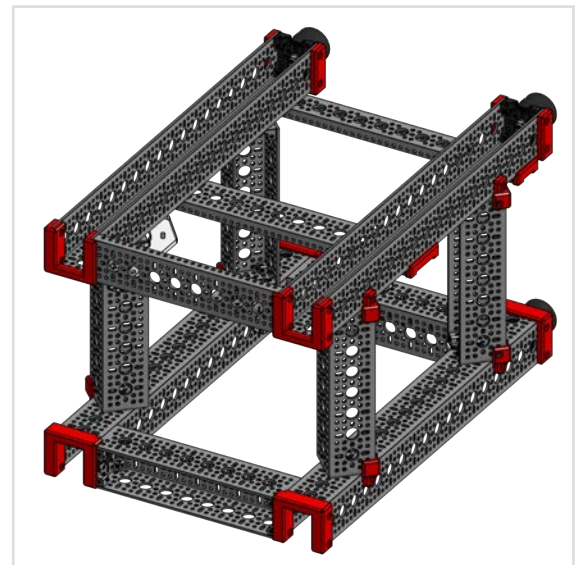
Talos IV frame is a 31cm by 37cm by 41cm cube assembled from Goblida aluminum channel. It supports the two aluminum rectangular enclosures, the six propulsion motors and an array of tools and sensors.
